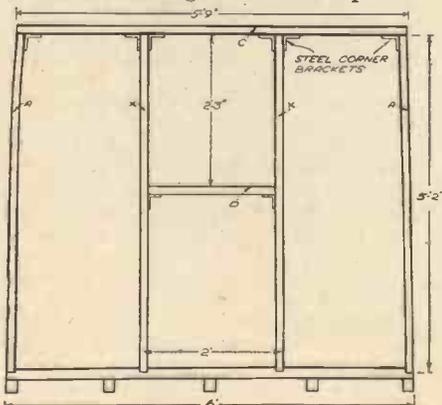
Elevation showing the members constituting the front of the body frame.
